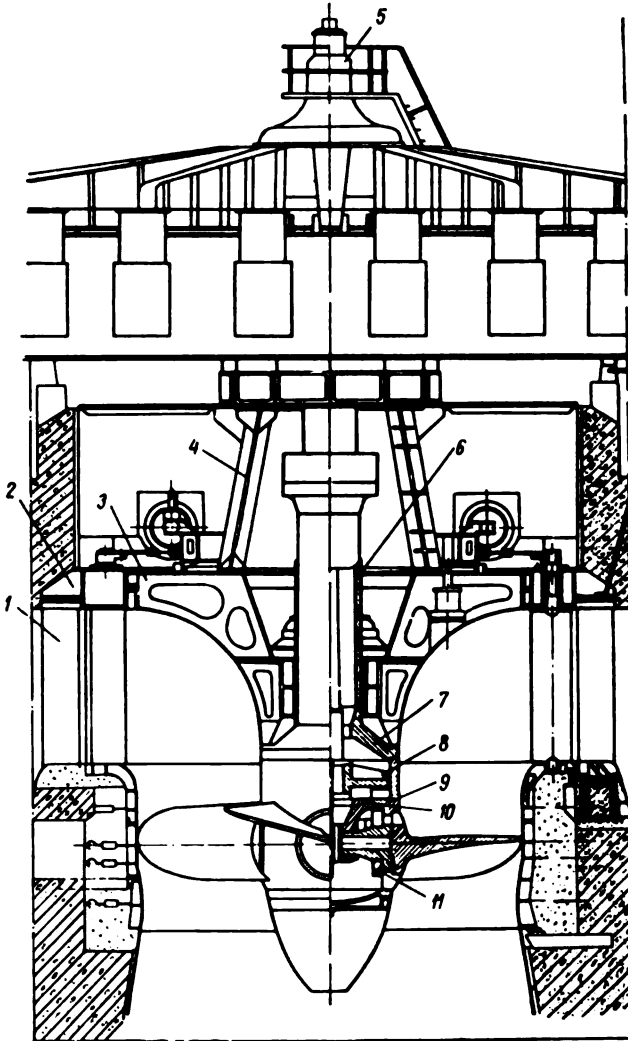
Sectional view of a Kaplan turbine (runner diameter $D_1 = 8.0$ m, power output $N = 58,000$ kw, and head $H = 14.2$ m)
